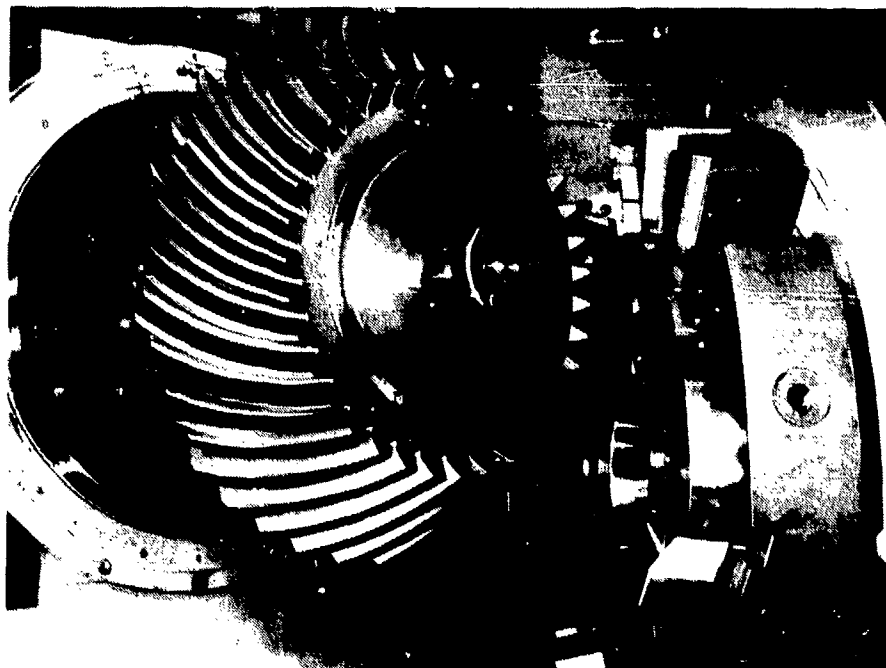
Precision hard-cut process for generated spiral-bevel gears. Gears are cut in soft condition, deep carburized to Rockwell C 60, press quenched to minimize distortion, then precision finished in hard condition by special carbide cutters on the same machine as the original cut. (Courtesy of Philadelphia Gear Corp.)
